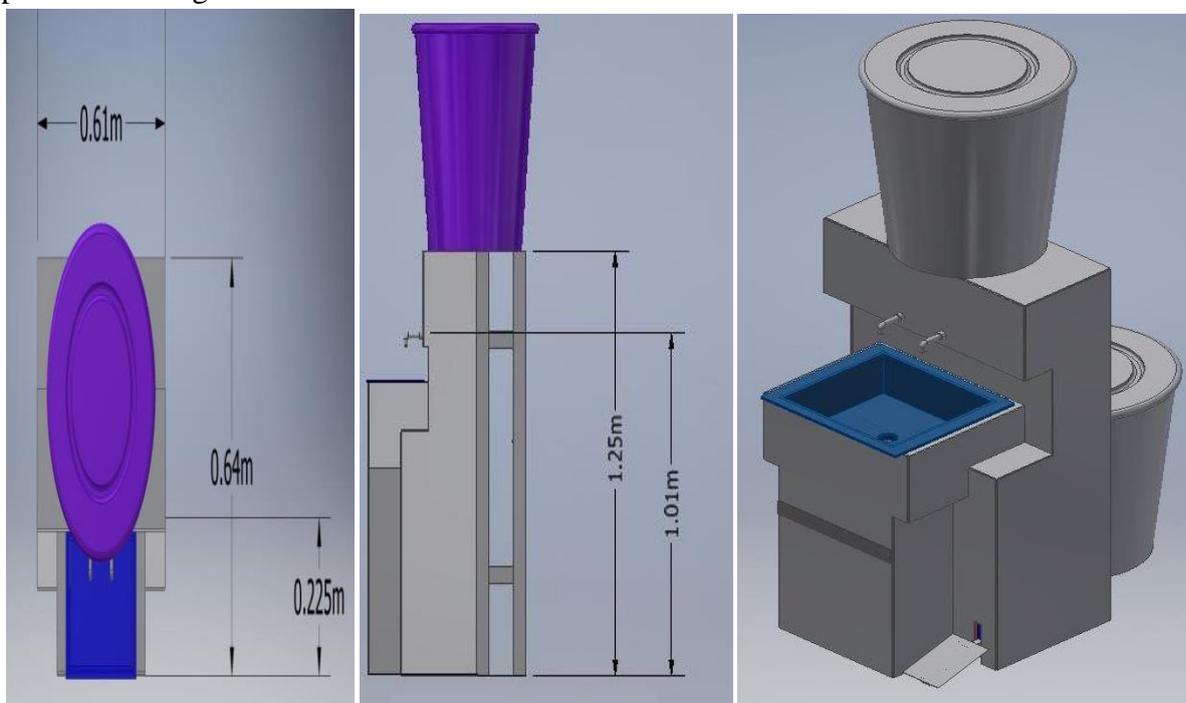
Top, Side, and Isometric Views of the Dispenser
